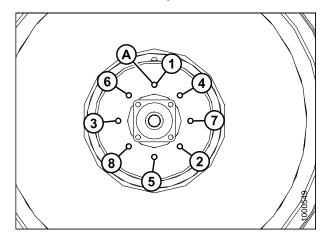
Forked Caster Wheel Nut Tightening Sequence
